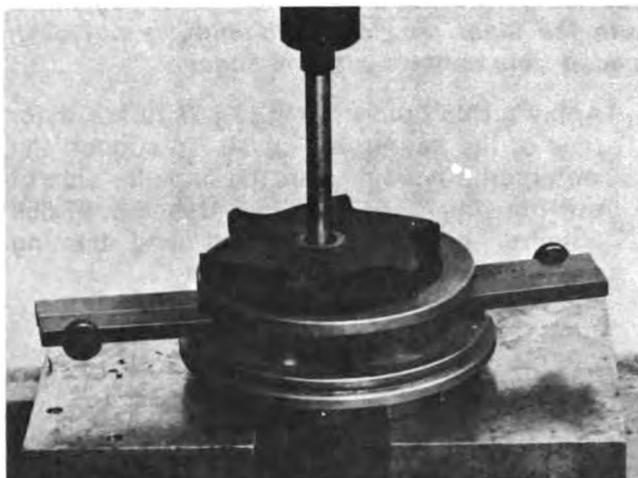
(N10847). Using A Press To Remove The Impeller.
